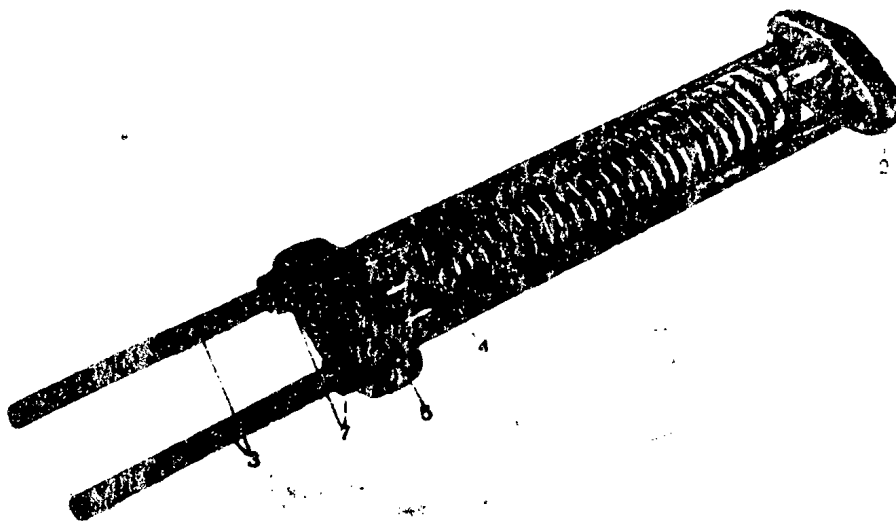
Tool for dismantling and assembling the compensating mechanism.
